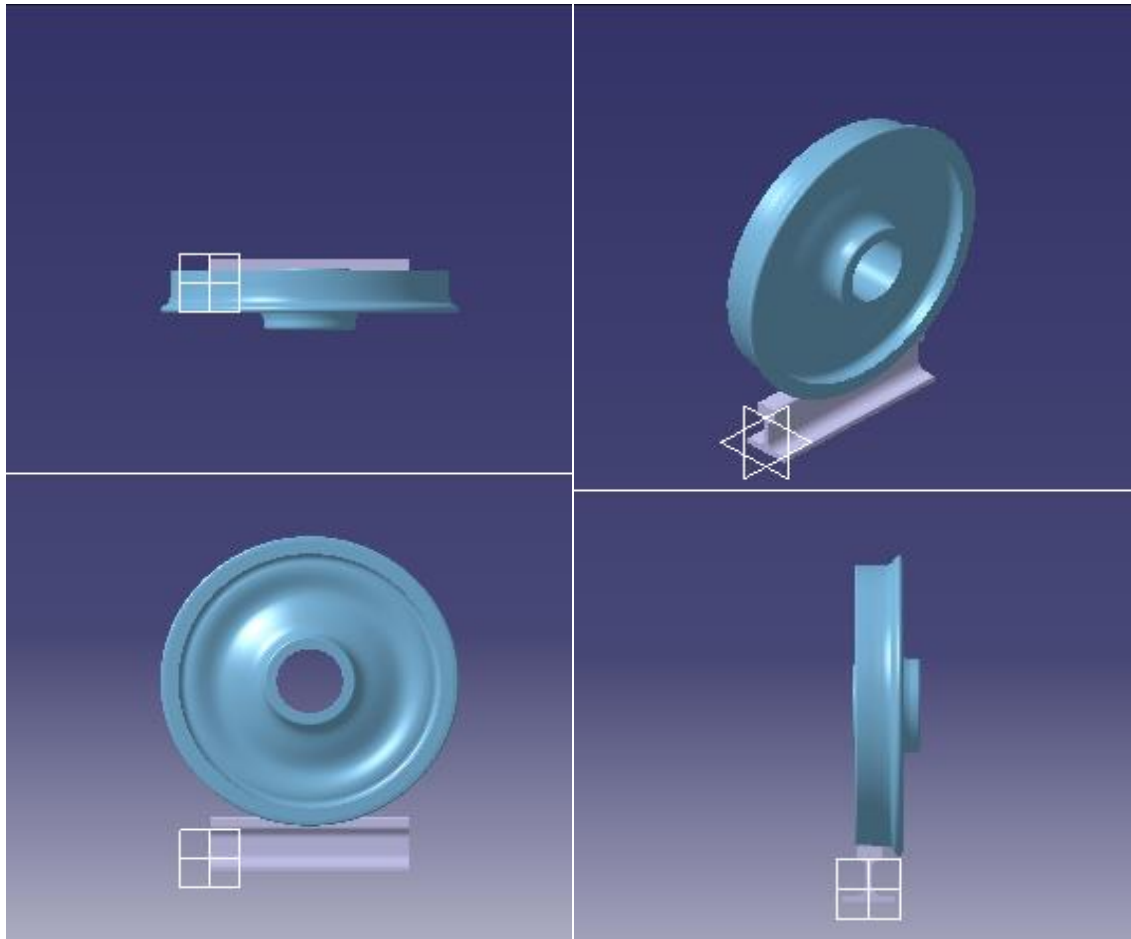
Rail-wheel assembly modes on CATIA rail head to wheel tread contact
